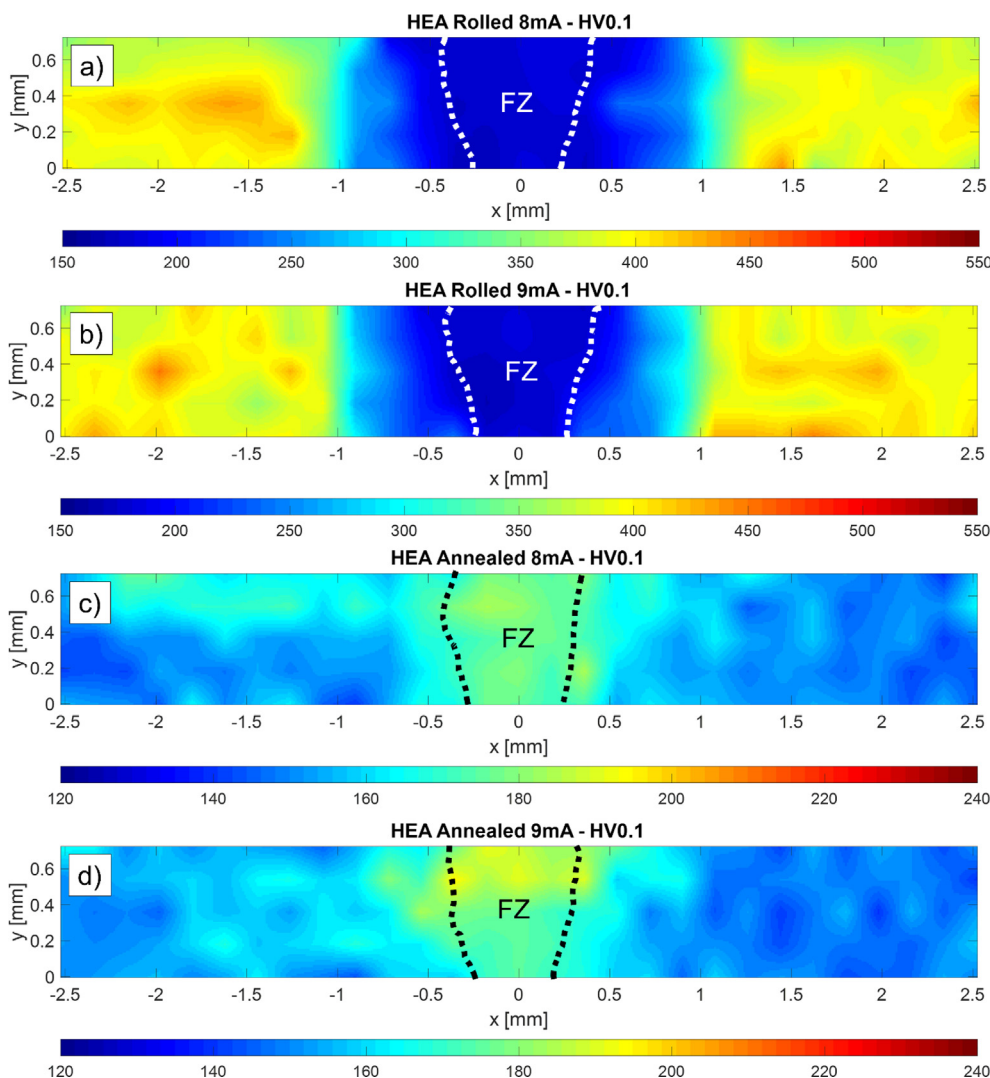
Hardness maps for the HEA welds: a) cold-rolled base metal welded with 8 mA; b) cold-rolled base metal welded with 9 mA; c) annealed base metal welded with 8 mA; d) annealed base metal welded with 9 mA.
